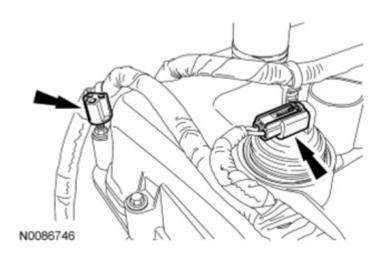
Locating VCT Oil Control Solenoid Electrical Connector And Wiring Harness Retainer Courtesy of FORD MOTOR CO.
